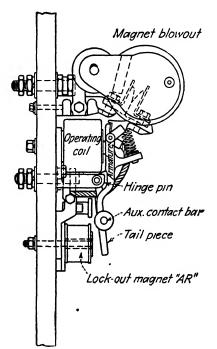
Cutler Hammer contactor with lock-out magnet under tailpiece. Contacts are in the closed position.
